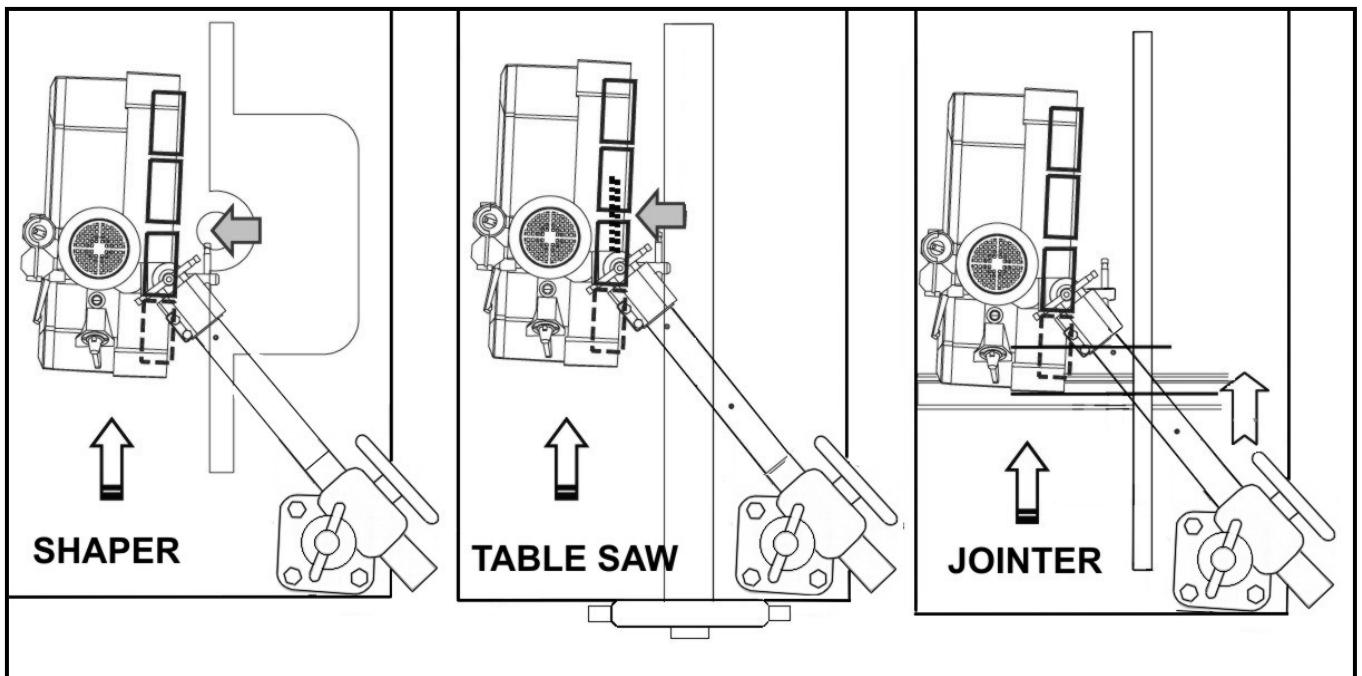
Power feeder mounting position on a shaper, table saw and jointer
